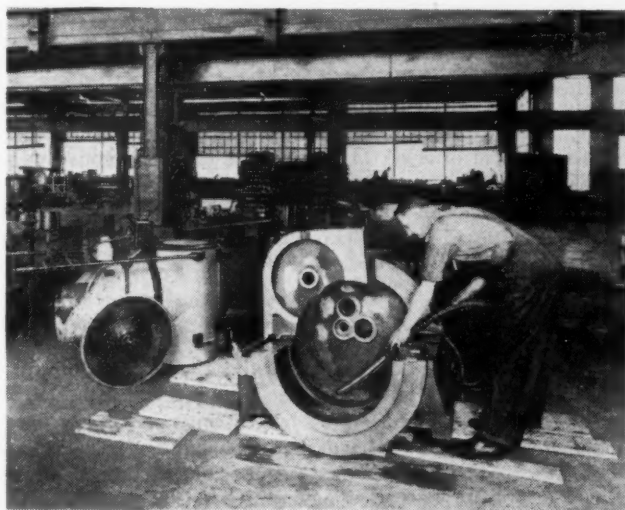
INDUSTRIAL VACUUM CLEANER IS USED TO ADVANTAGE IN SALVAGING CHIPS FROM LARGE CASTINGS, INCIDENTALLY CLEANING THE CASTING AS WELL
